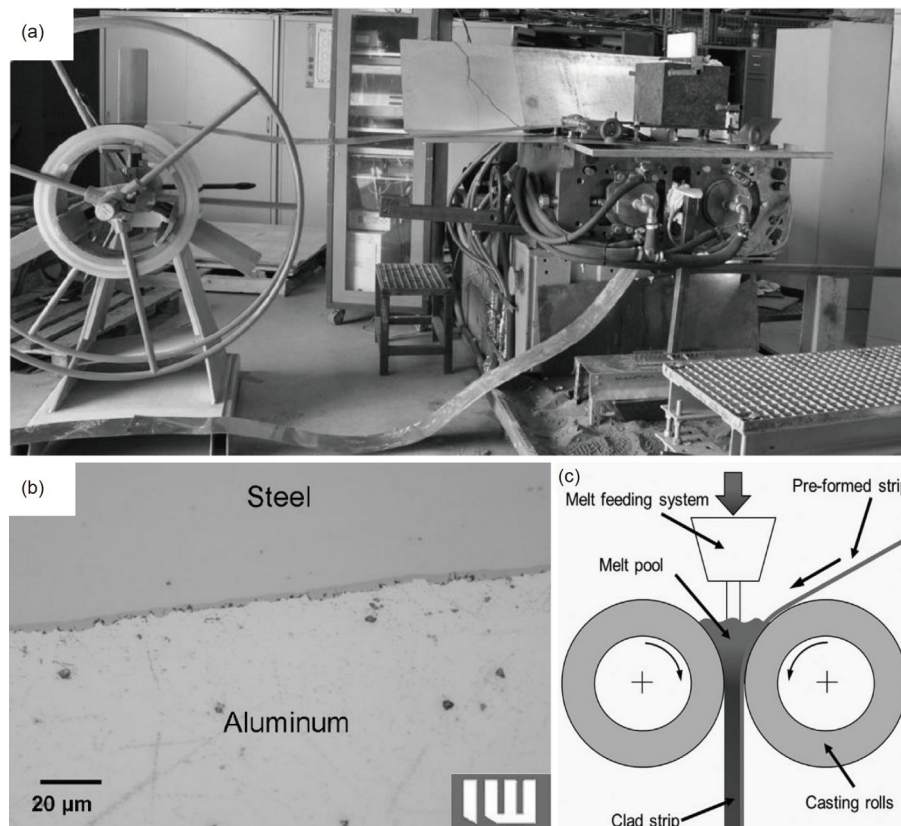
TRC process of clad steel strip. (a) Twin-roll strip caster for producing clad strip [102]; (b) microstructure of the seam and the parent material of the clad strip [102]; (c) schematic diagram of TRC for producing clad strip [20]. (a), (b) Reprinted with permission from ref. [102], Copyright © 2013 The Society of Manufacturing Engineers. Published by Elsevier Ltd. All rights reserved. (c) Reprinted with permission from ref. [20], © 2015 WILEY-VCH Verlag GmbH & Co. KGaA, Weinheim.
